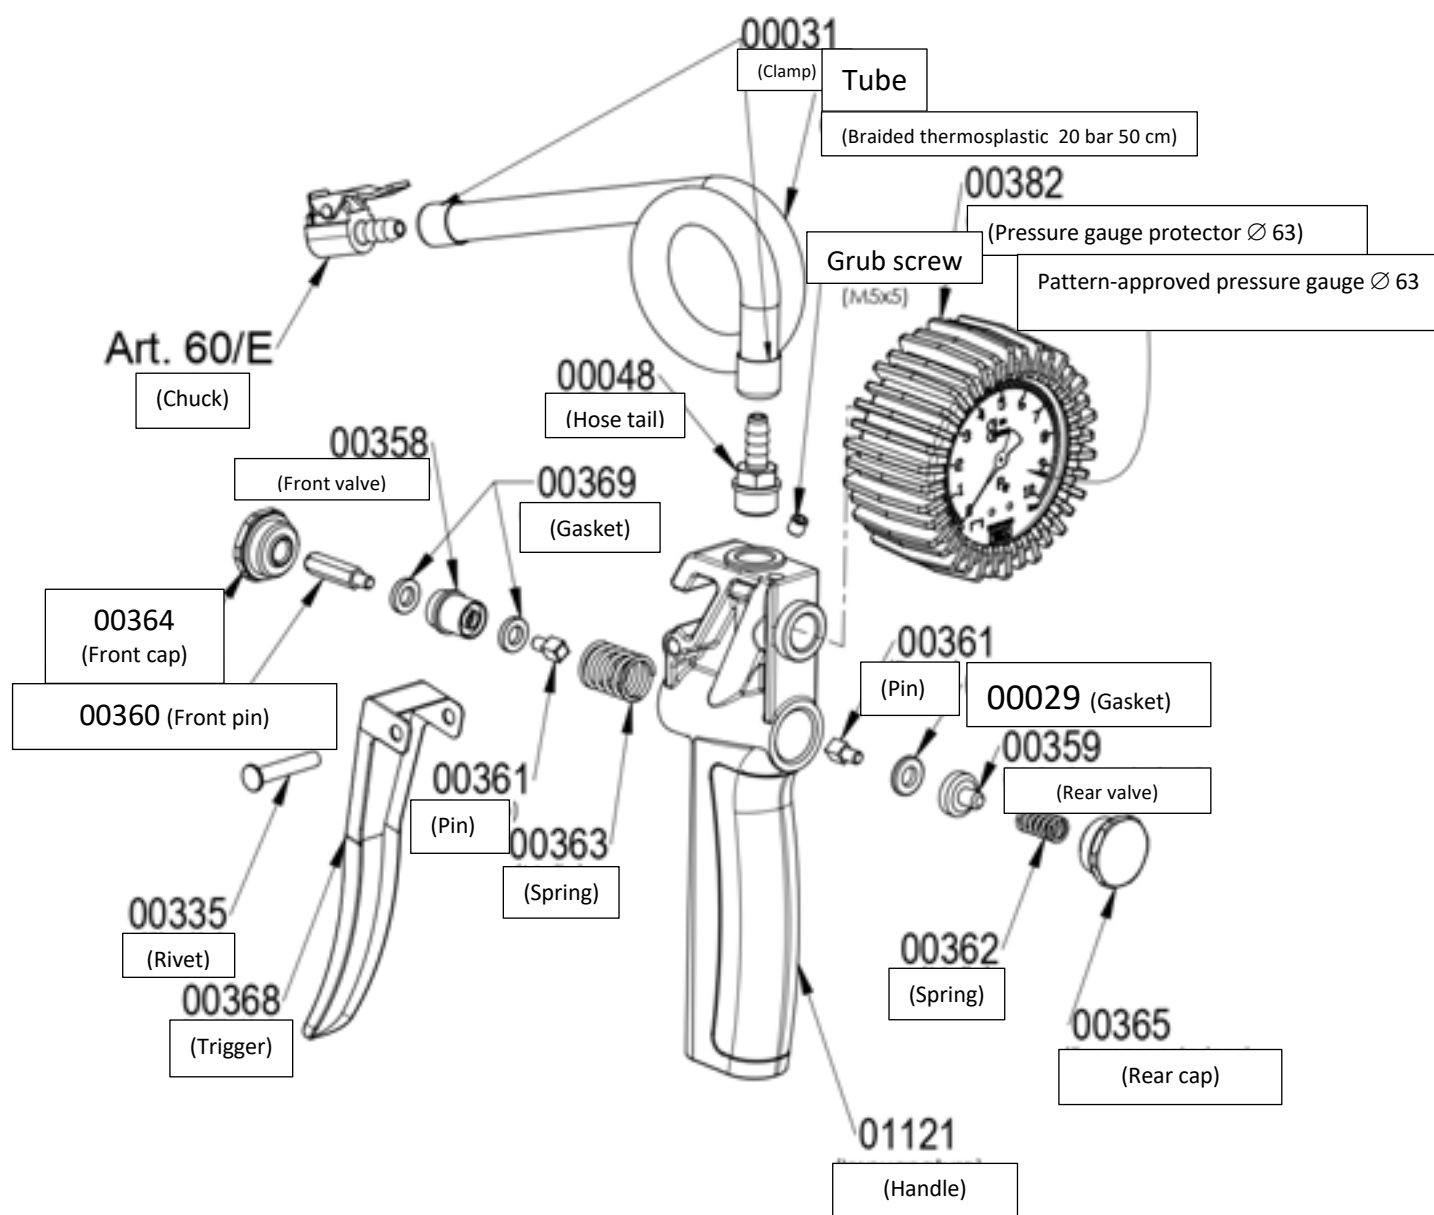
EXPLODED VIEW OF TYRE PRESSURE GAUGE “60 G/T” (vers. 63 mm)
